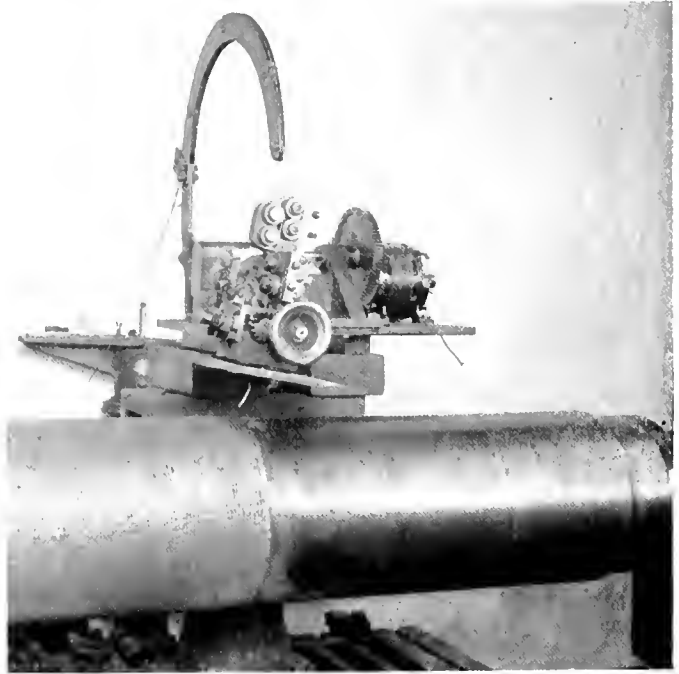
14-in. Shaft with Fit Increased  $\frac{3}{4}$ -in. in Diameter by Automatic Arc Welding Process
